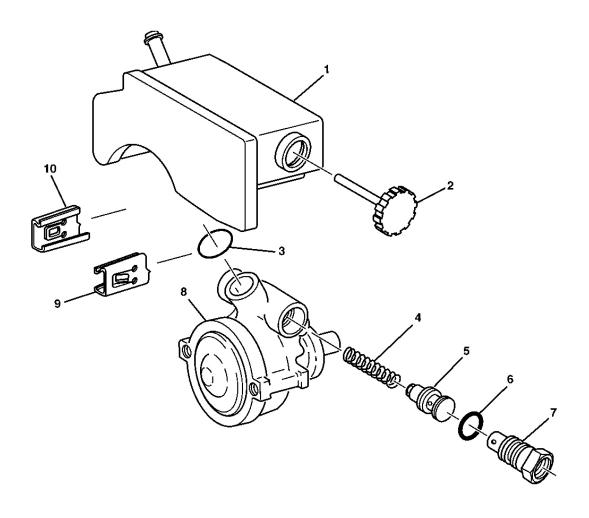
Exploded View Of Power Steering Pump Components (CB Series) Courtesy of GENERAL MOTORS CORP.
